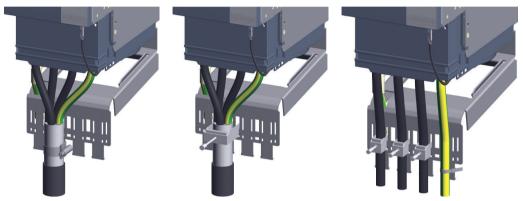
Shield support with hose clamp (left), shield connection clamp (center) and three shield connection clamps for single cores (right)
